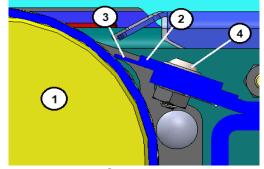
Scraper Adjustment (Cross-Section View) Key 1 – Roller Key 2 – Top Plate
